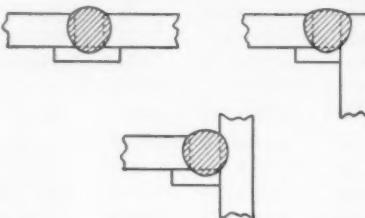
Square-groove joint designs welded from one side with backing. Complete joint penetration is shown. These joints are satisfactory for material thicknesses to $\frac{3}{16}$ in.
